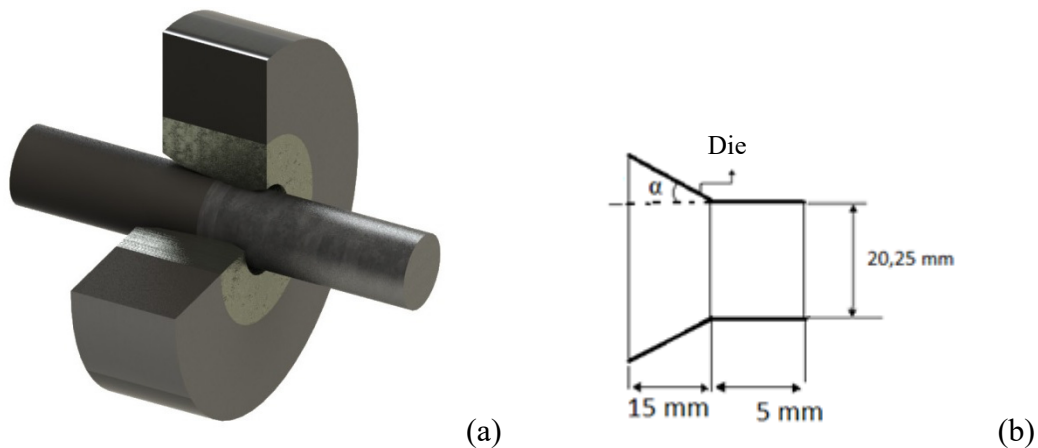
Wire drawing tool (a) and the tool dimensions (b).
